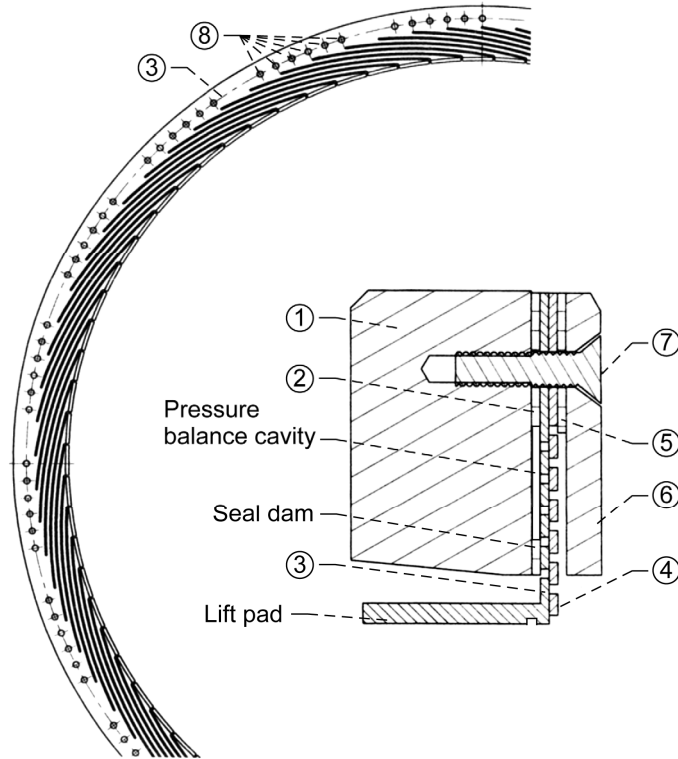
Non-contacting finger seal design: 1, back plate; 2, aft spacer; 3, aft finger element; 4, forward finger element; 5, forward spacer; 6, front plate; 7, screw; 8, indexing and screw holes.
